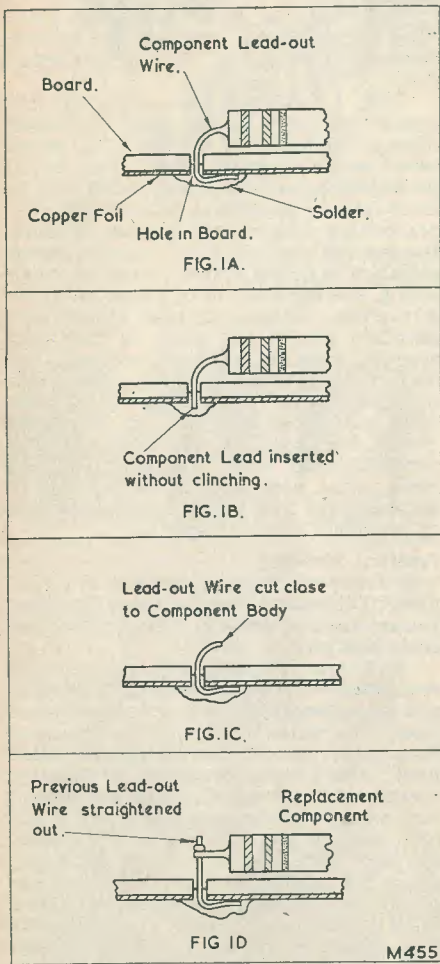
(a). Cross-sectional view showing a lead-out wire from a resistor clinched to a printed circuit board before soldering
